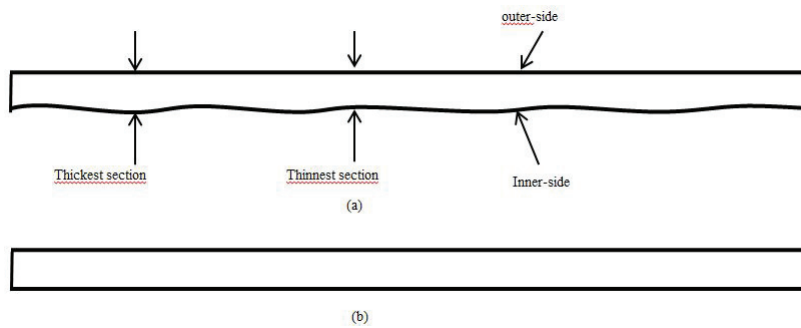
a. Geometrical surface of outer wire including irregularities; b) Geometrical surface of smooth centre wire
